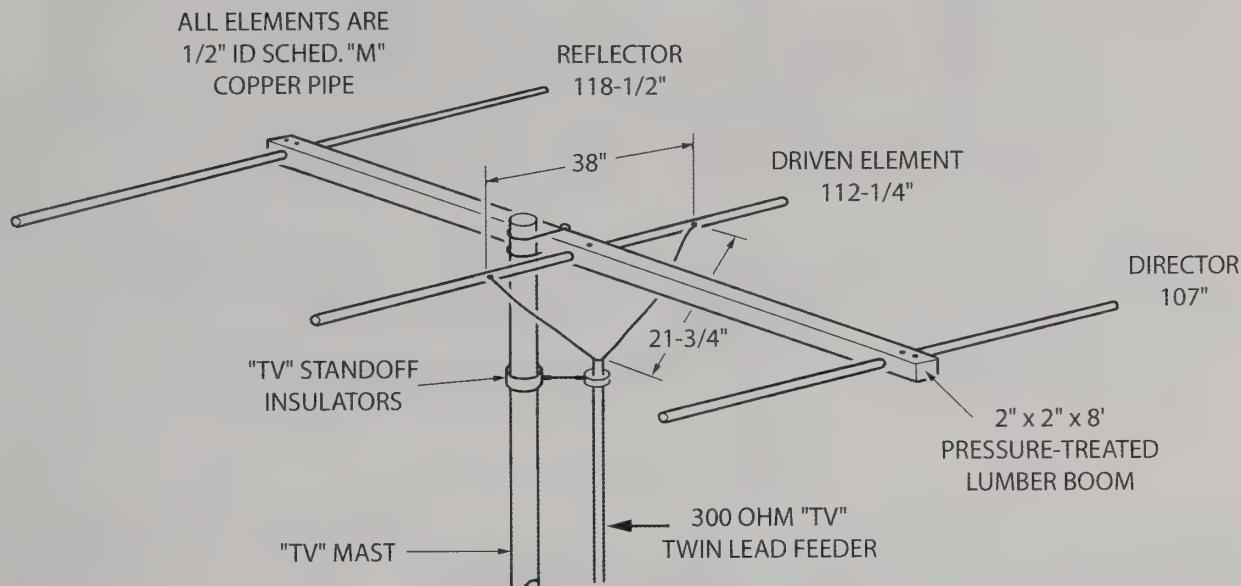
The completed three-element 6-meter beam. (Drawings courtesy Randy Kaeding, K8TMK, Heathkit Co., Benton Harbor, MI)
